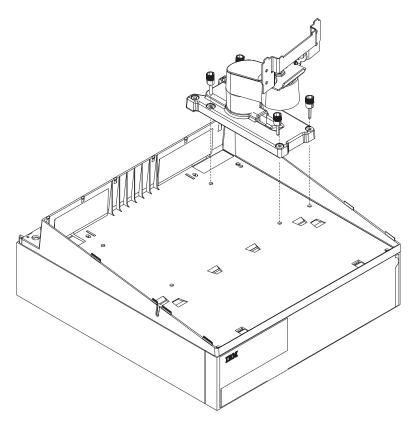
Securing the arm assembly to SurePOS 720, 740, 780
